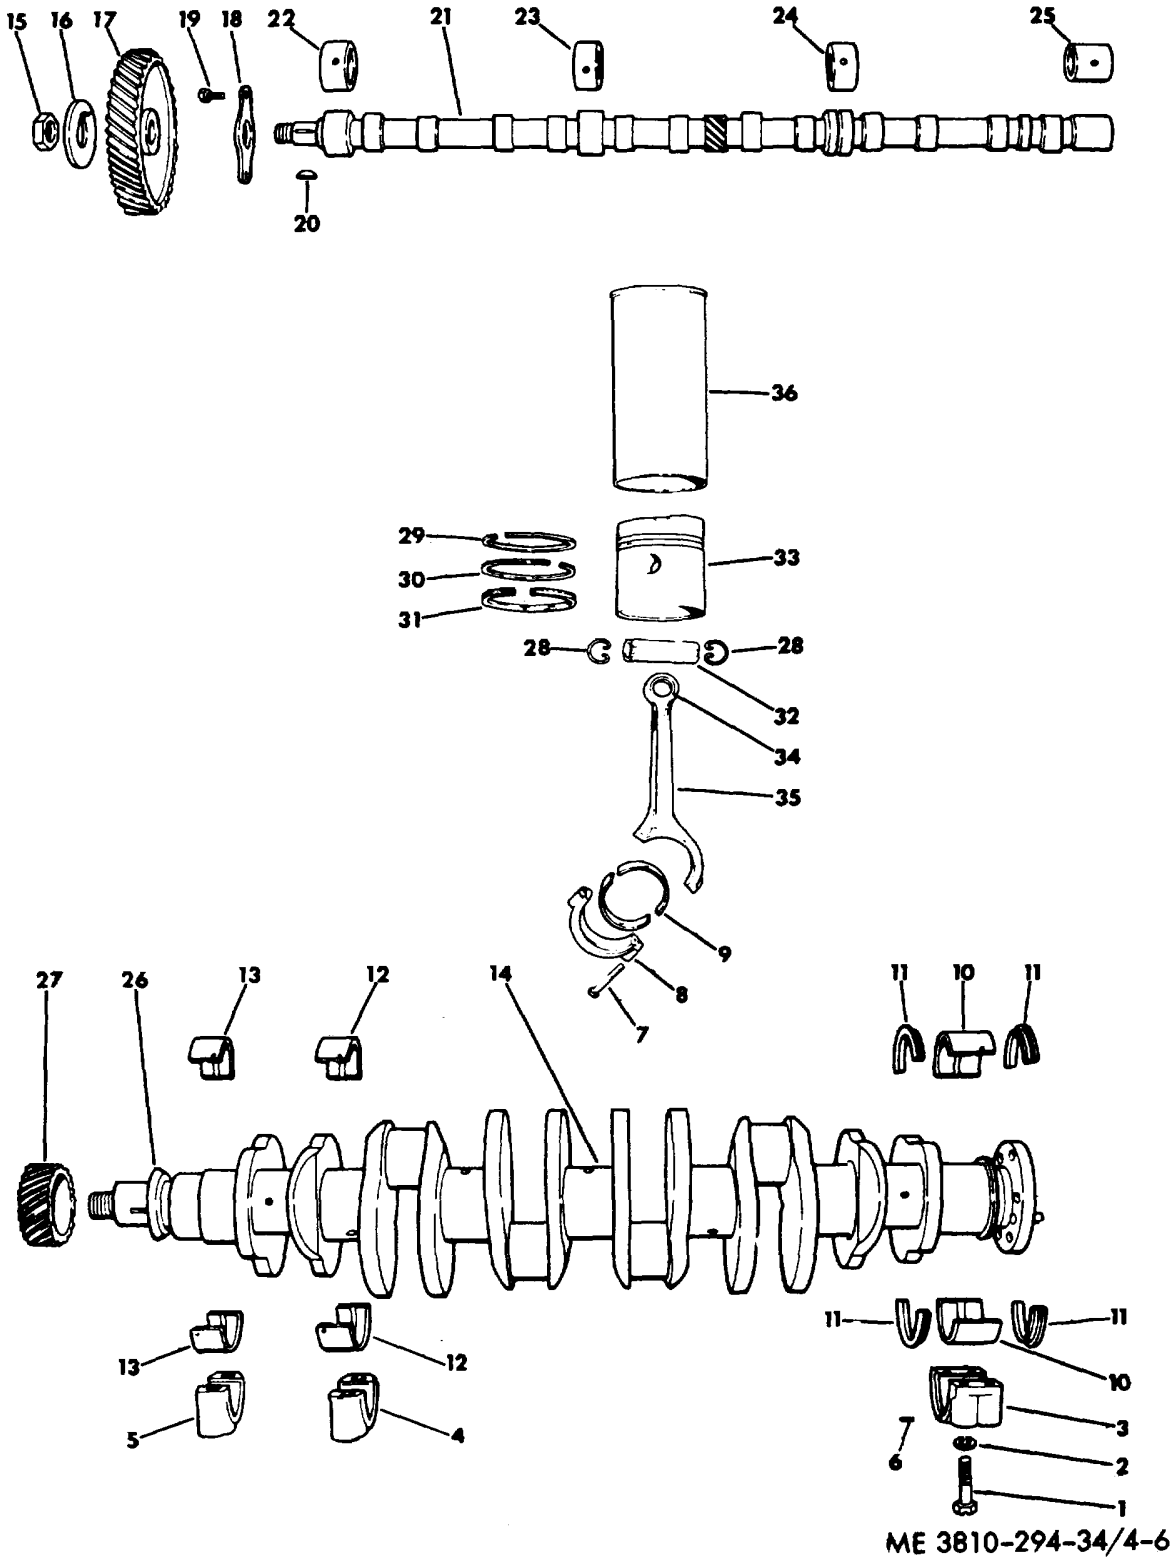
Camshaft, crankshaft, piston and rod, exploded view.
